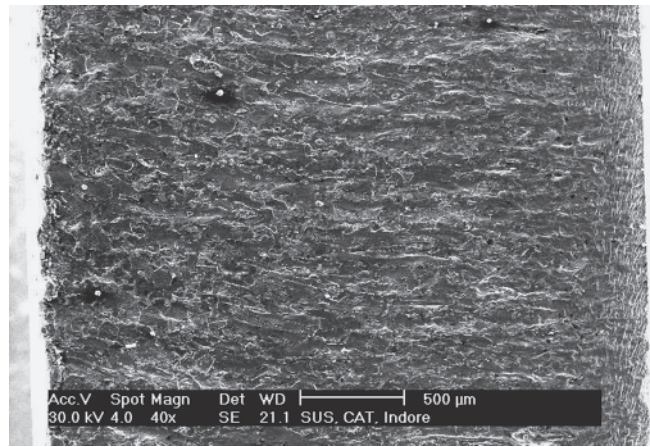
Low-magnification view of the laser-cut surface of the SS sheet: (right) top edge; (left) bottom edge
